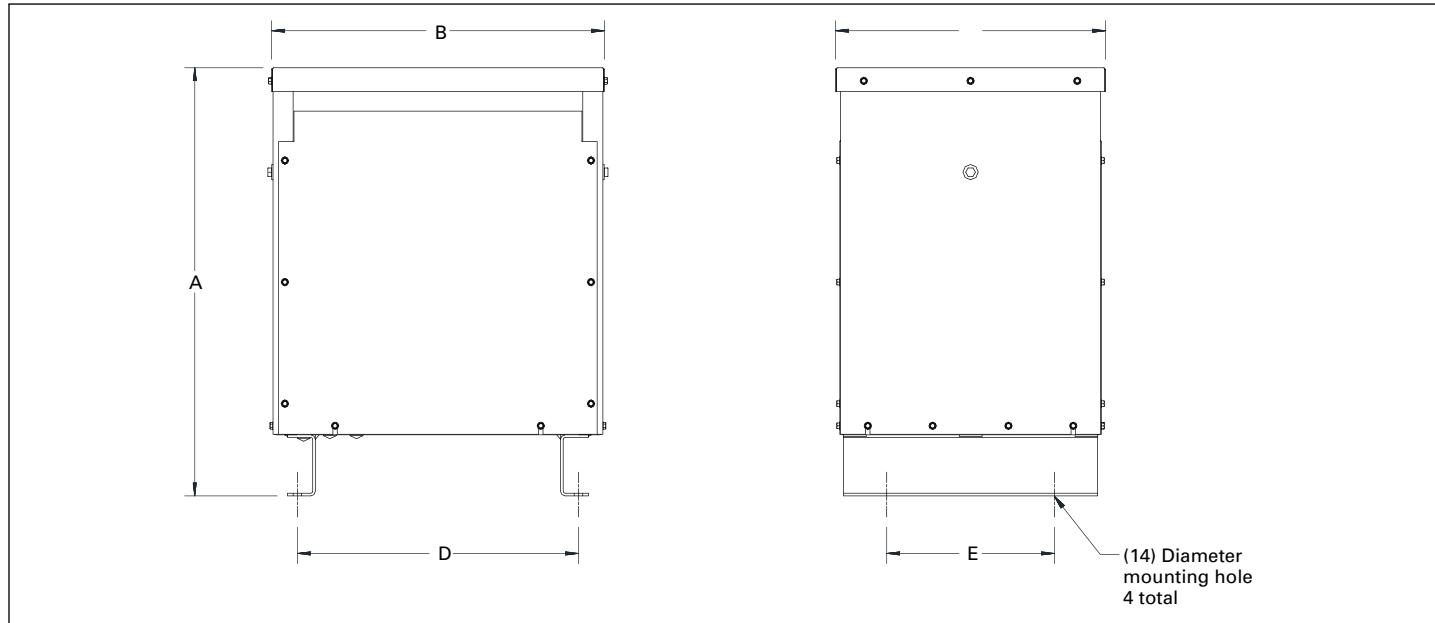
Single-phase enclosures—dimensions in inches (mm)
